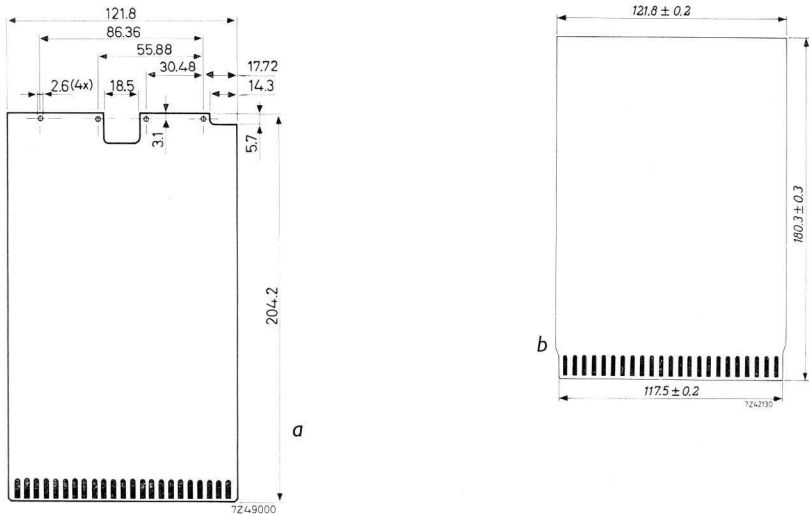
Dimensions of printed wiring boards to fit chassis type 4322 026 38240; (a) standard. (b) short (chassis depth adjusted by using extra holes in side panels). Board thickness: 1.6 ± 0.2 mm.
